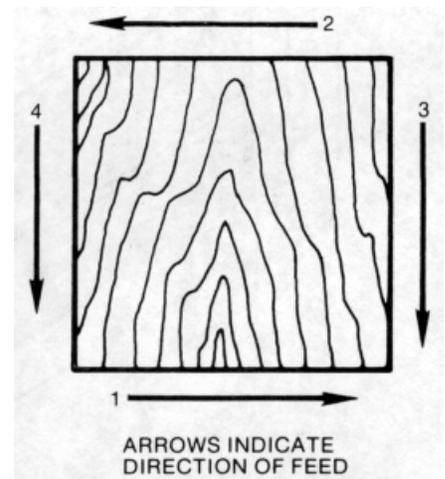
When all four edges of a piece of stock must be jointed, follow the pass sequence shown here. The final passes will remove the imperfections caused by cross-grain cutting.
